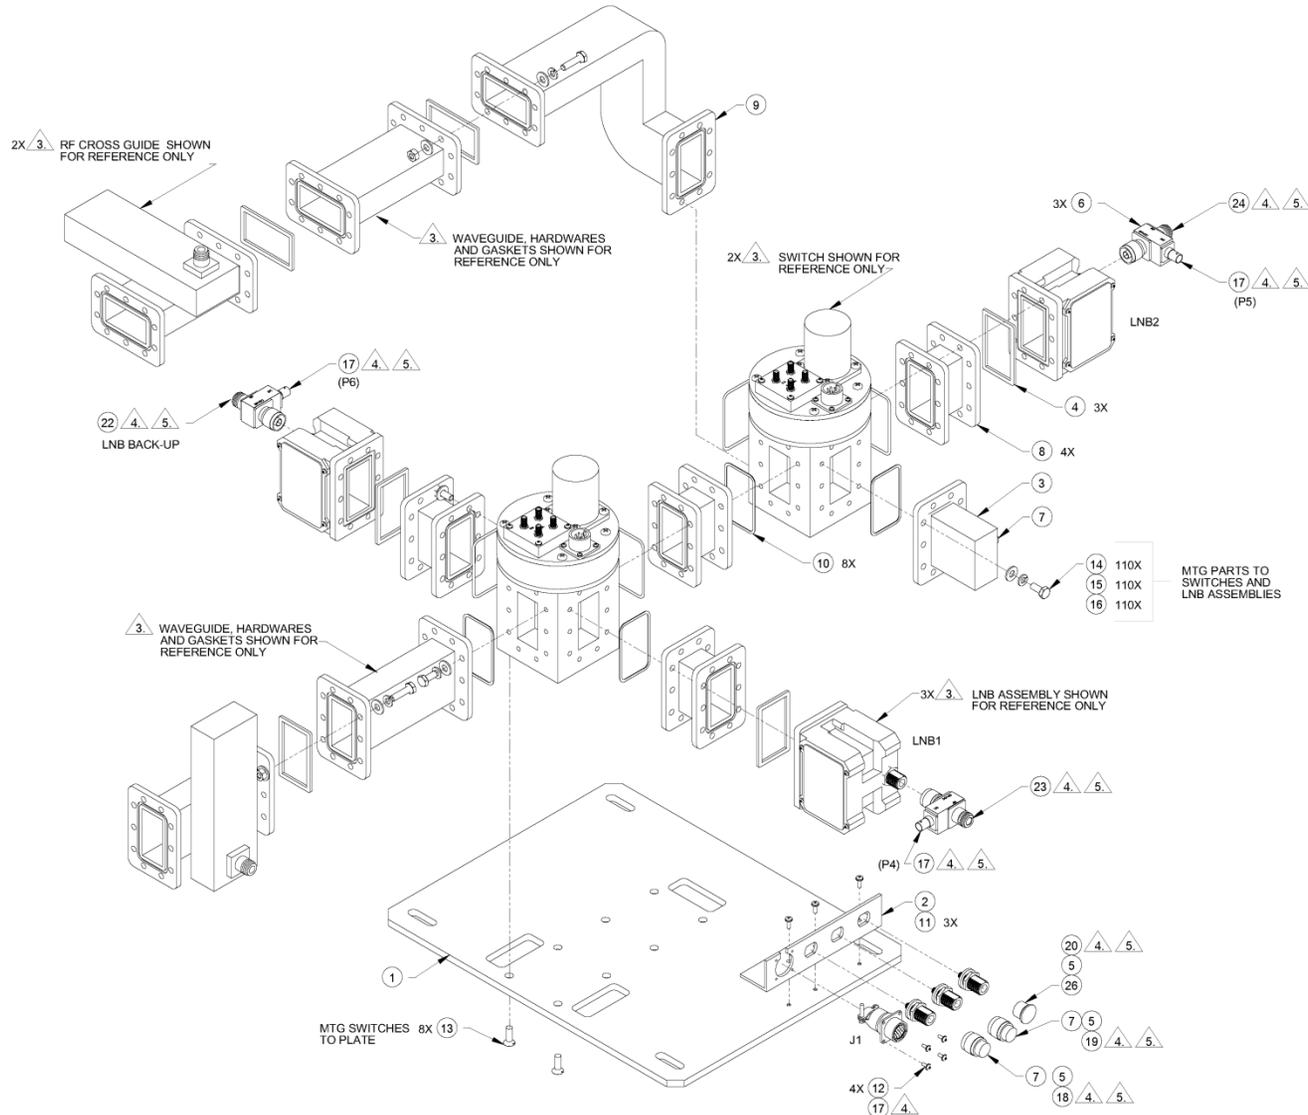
C-Band LNB 1:2 Redundant System (Exploded View)
